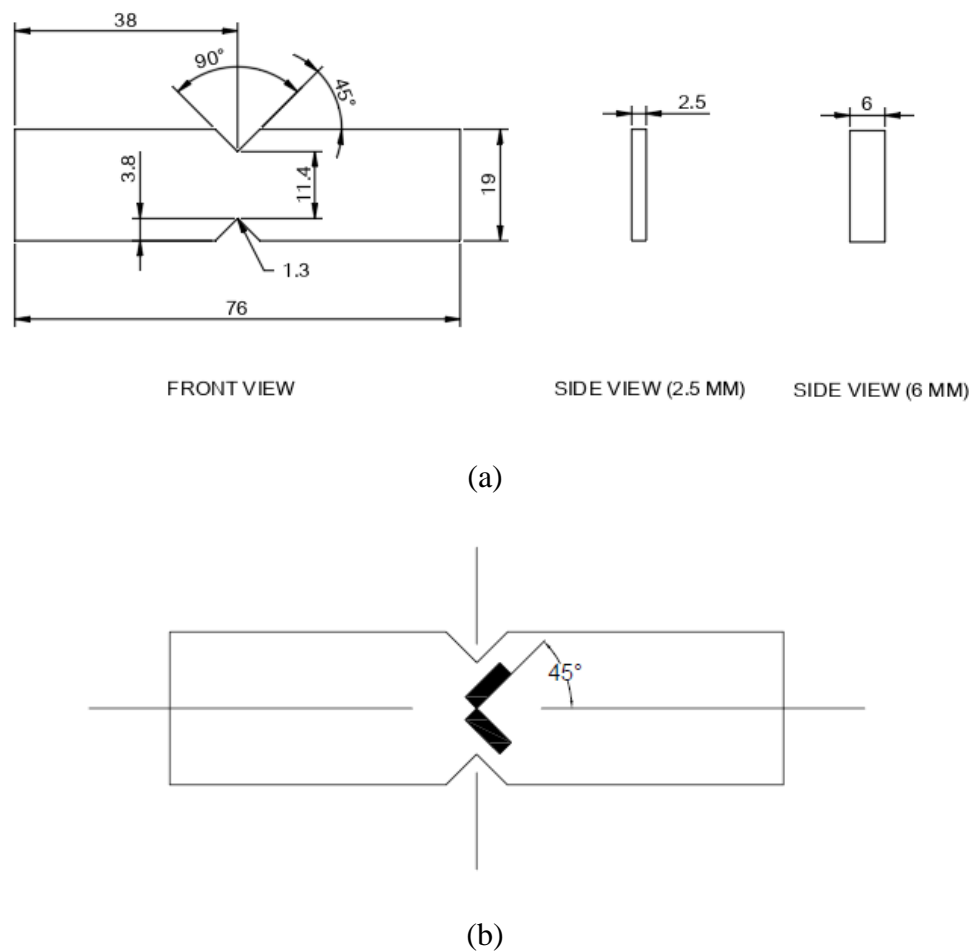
Shear test coupon specimens: (a) Coupon dimension, and (b) Strain gauges configuration (reproduced from ASTM D5379-19 [2019] – all dimension in mm)
